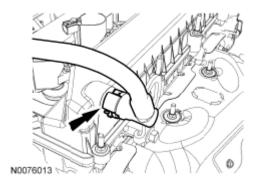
Locating Crankcase Vent Tube And Valve Cover Courtesy of FORD MOTOR CO.
